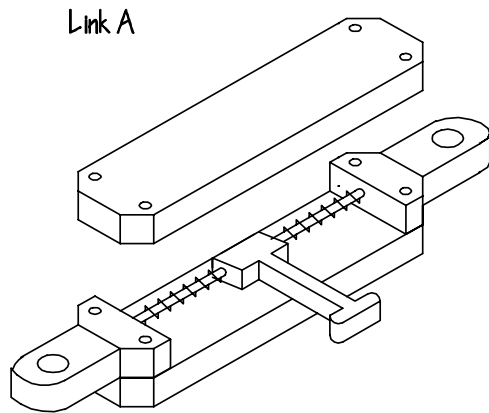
Semi-exploded view of link A showing the spring loaded protrusion.
